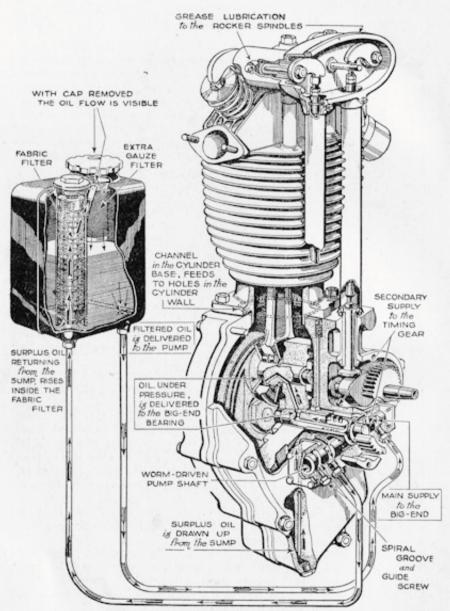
Showing the Dry Sump Lubrication System on Most 1935-6 S.V. and O.H.V. Singles
